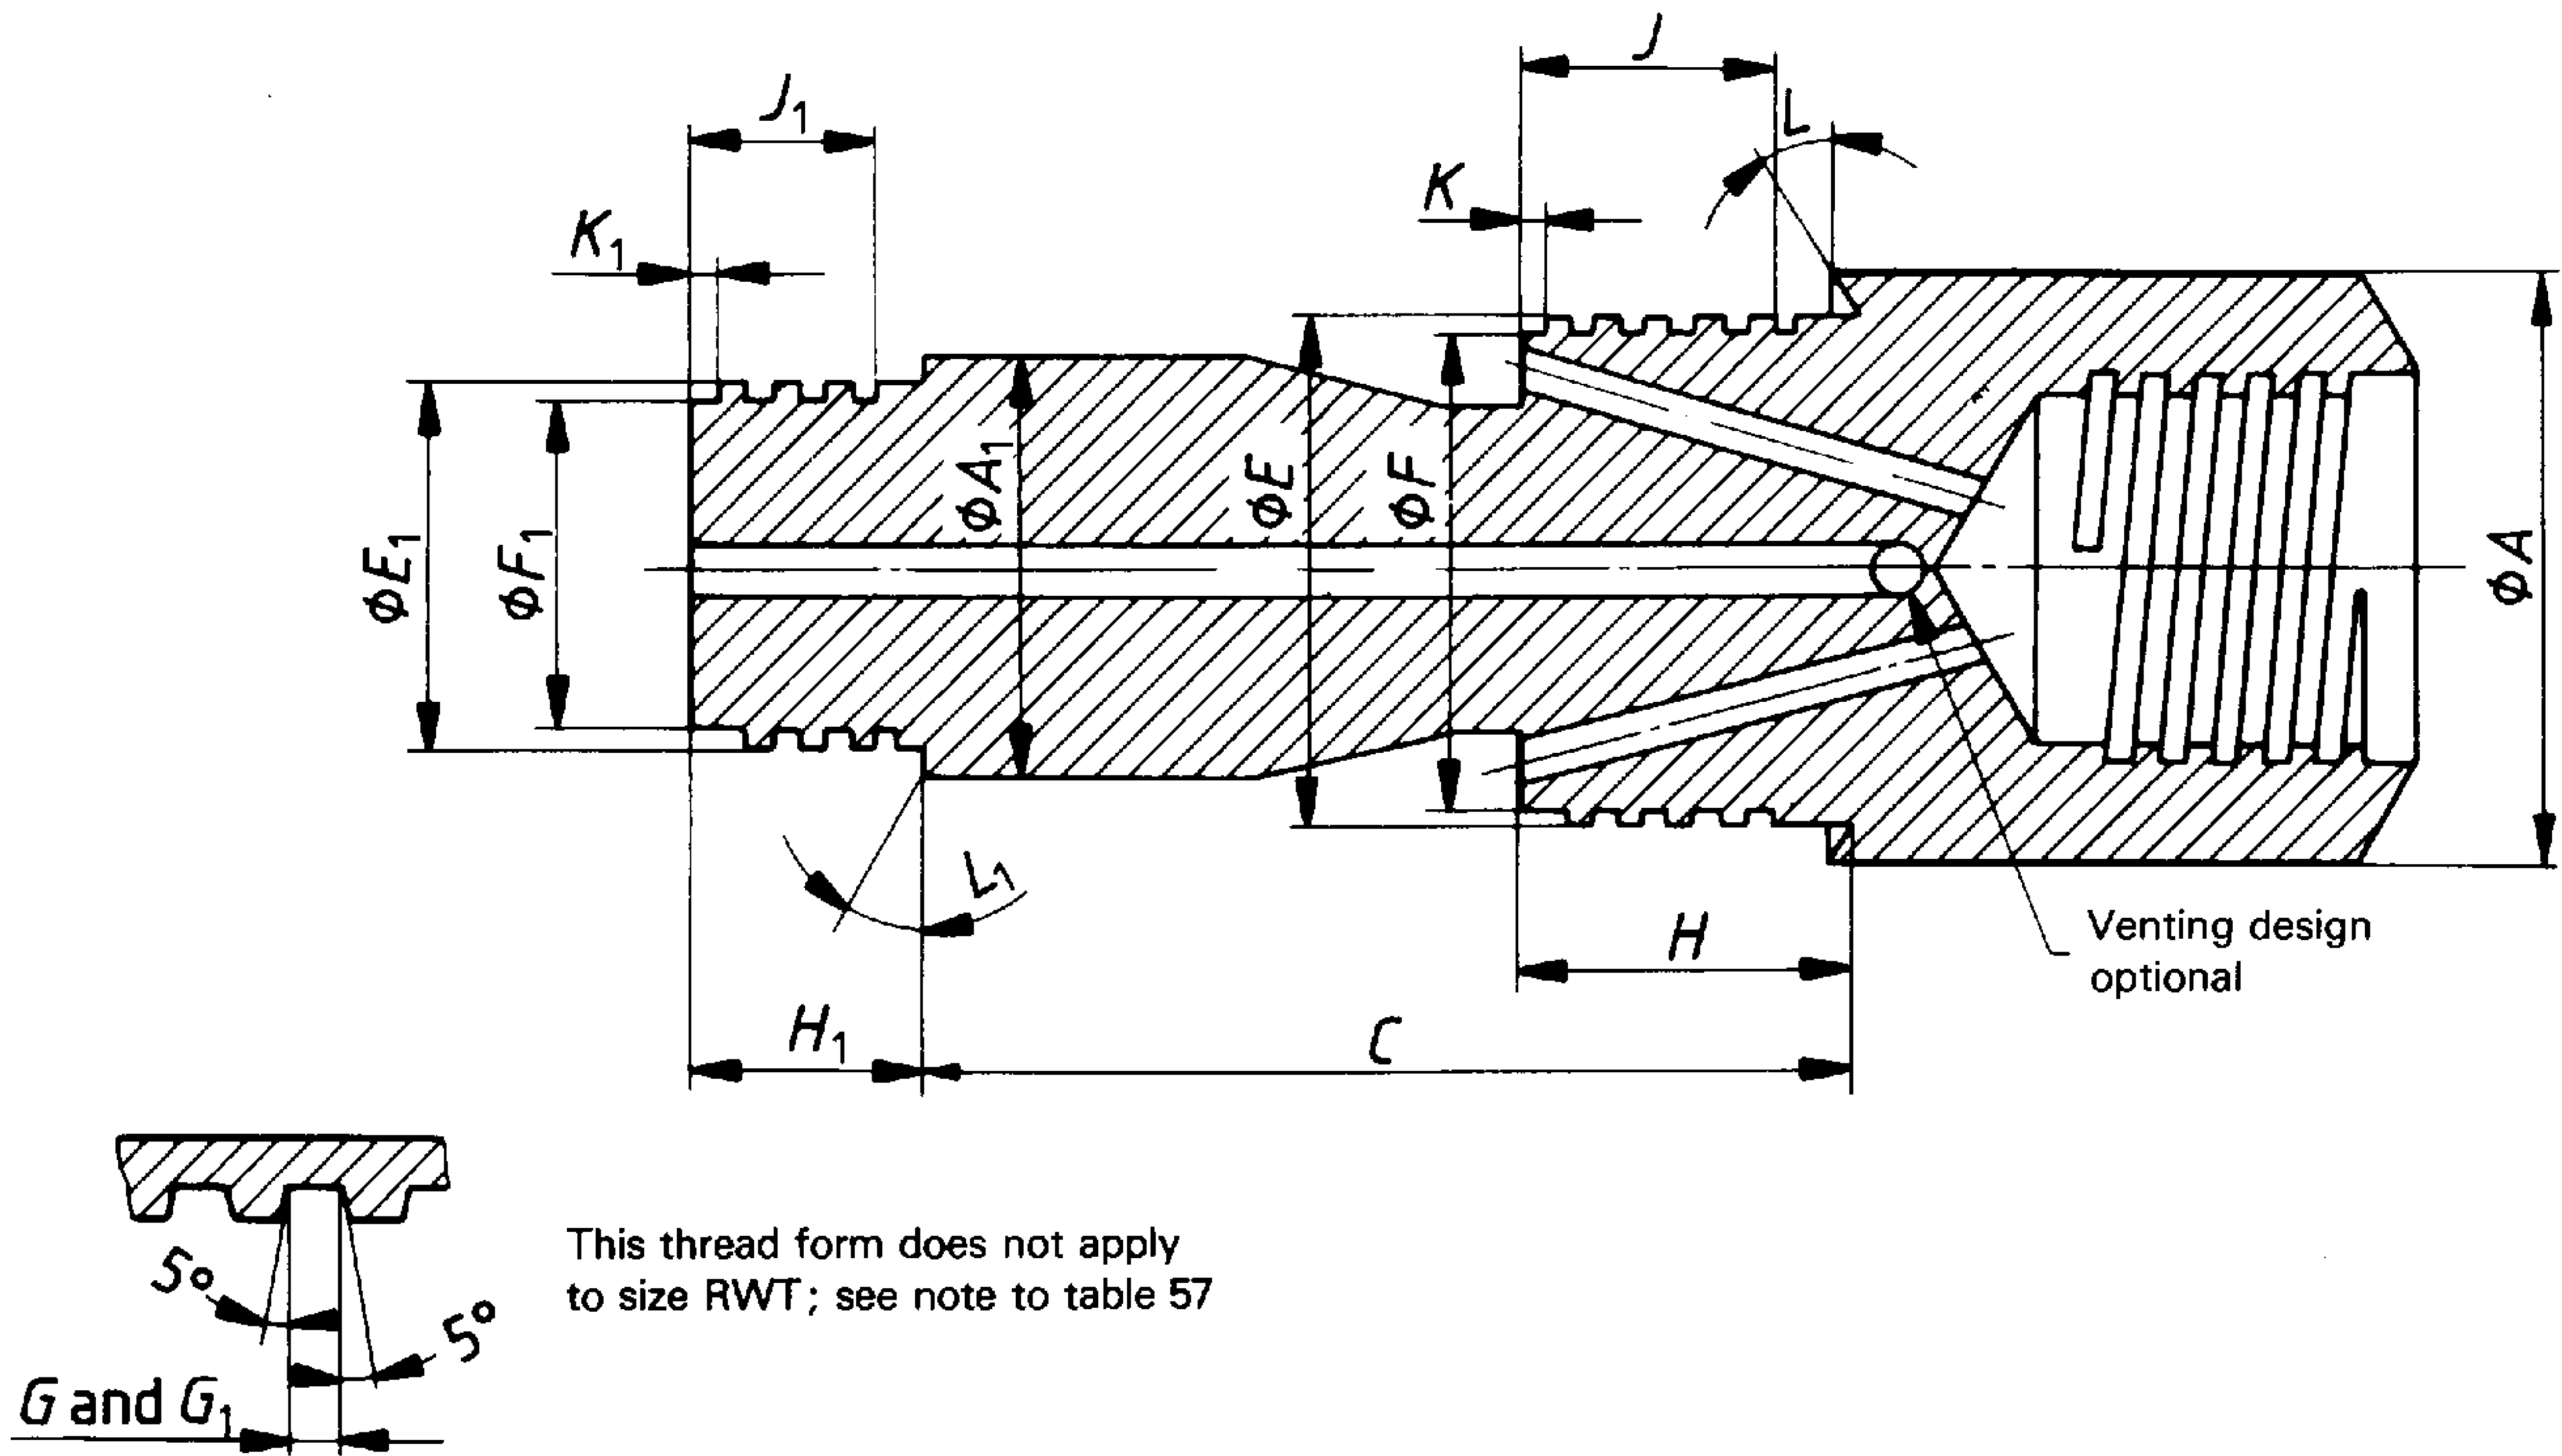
"WT" design double-tube core barrel — Head — Sizes RWT, EWT and AWT (see table 57)
